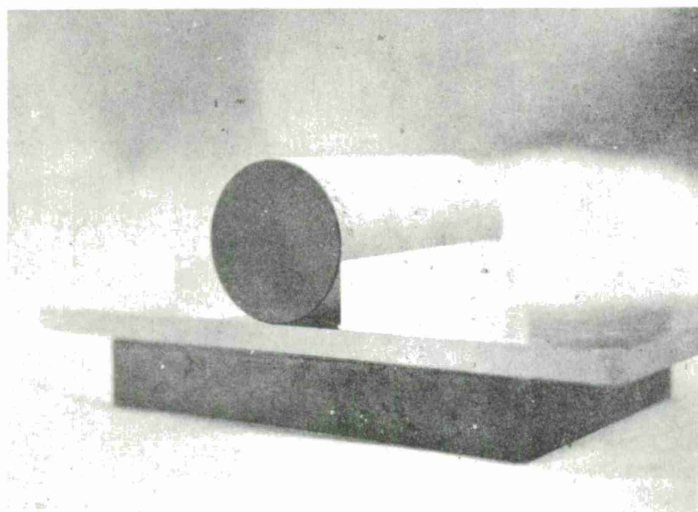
Fiber Optic Boule Assembly Ready for Sawing
